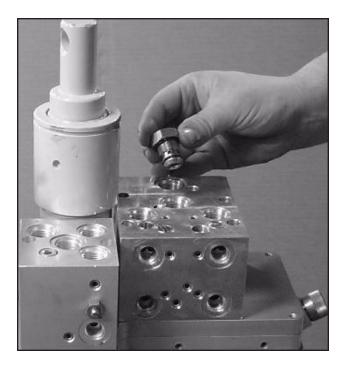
Replace the two o-rings and install Check Valve Assembly into the Super V Valve Block Assembly. Use a 15/16" socket to tighten the Check Valve Assembly.
